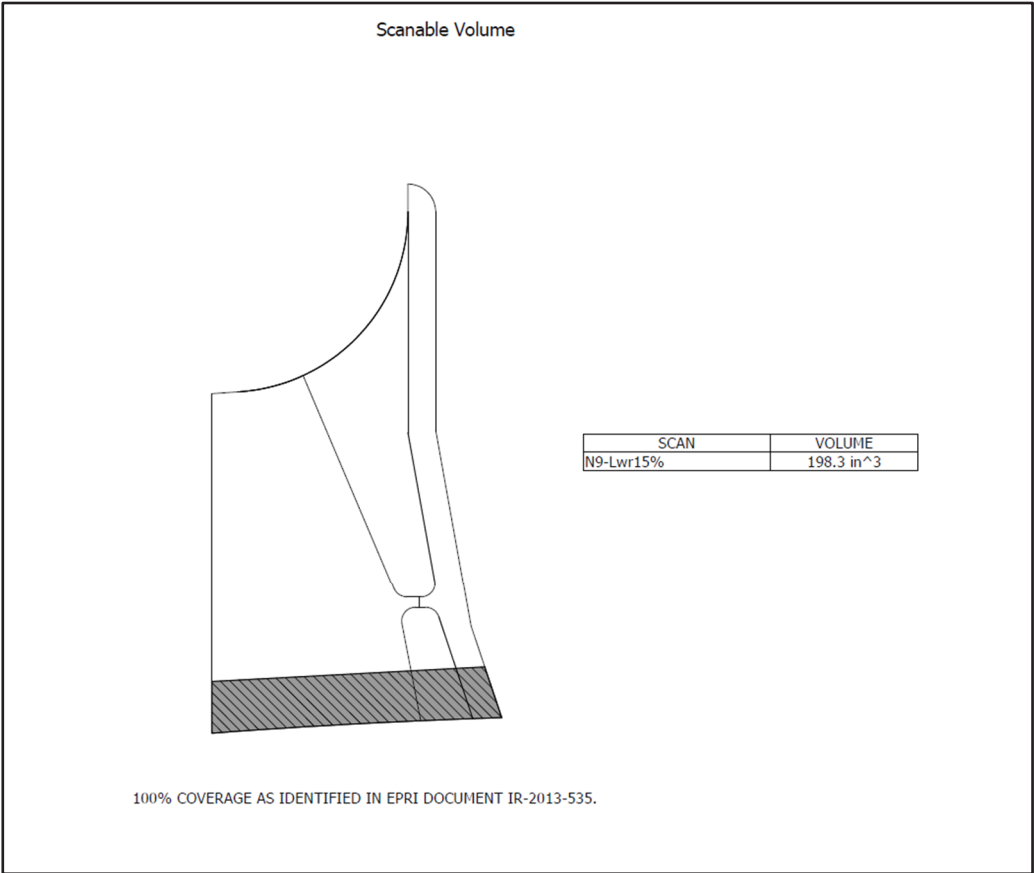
Weld N9-NV, Inner 15% Coverage Achieved
